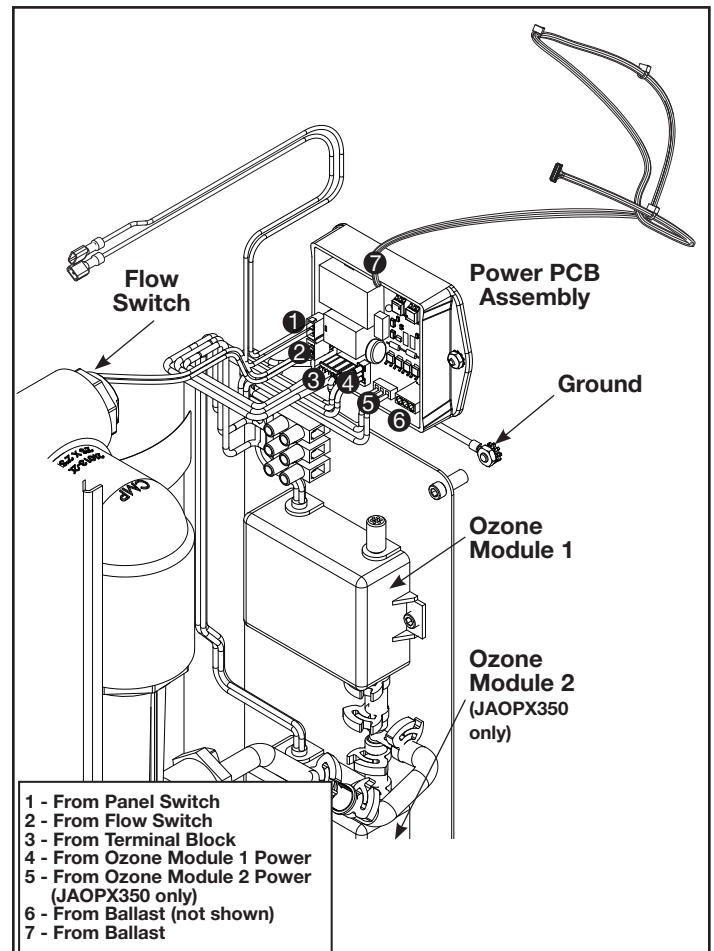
LED PCB Board and Power PCB Board Assemblies Wiring Connections
